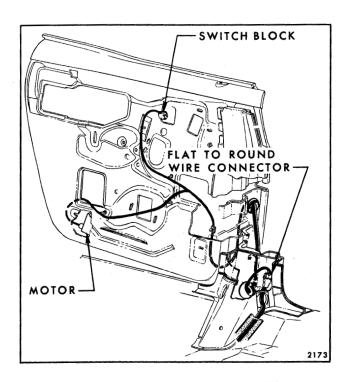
Left Rear Door Power Window Wiring -"A"-39 Styles
